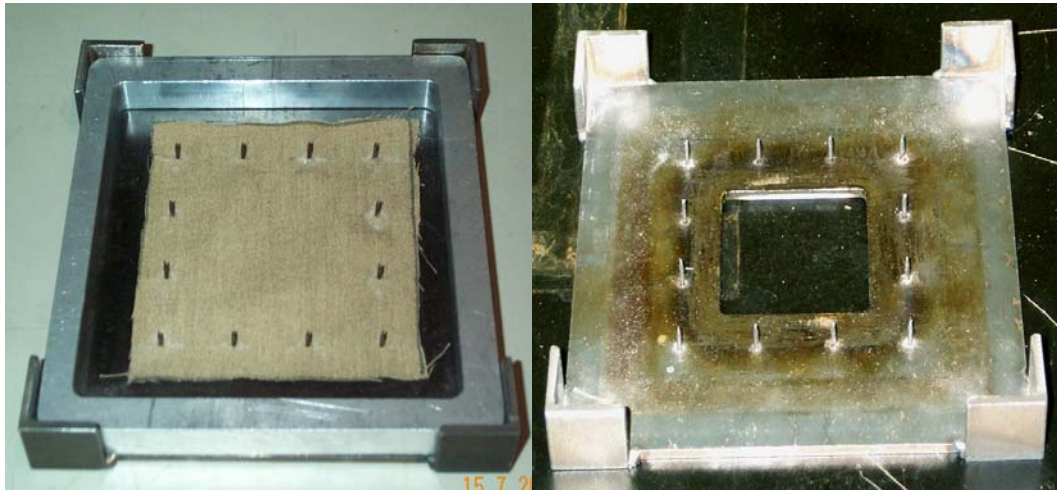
Specimen Holder with/without Fabric Sample and Aluminum Spacer
